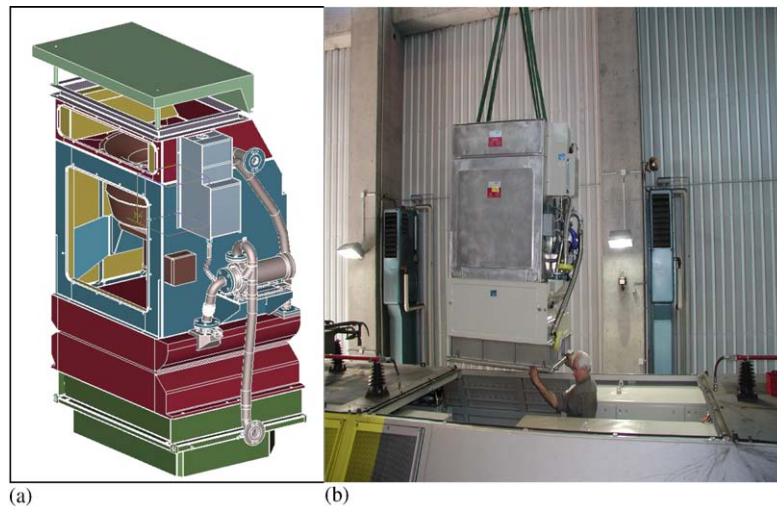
Application of a modified oil cooling tower in the type 182 locomotive to investigate the noise reduction potential by optimised ventilation ((a) design sketch of the cooling tower and (b) assembly in the locomotive).
